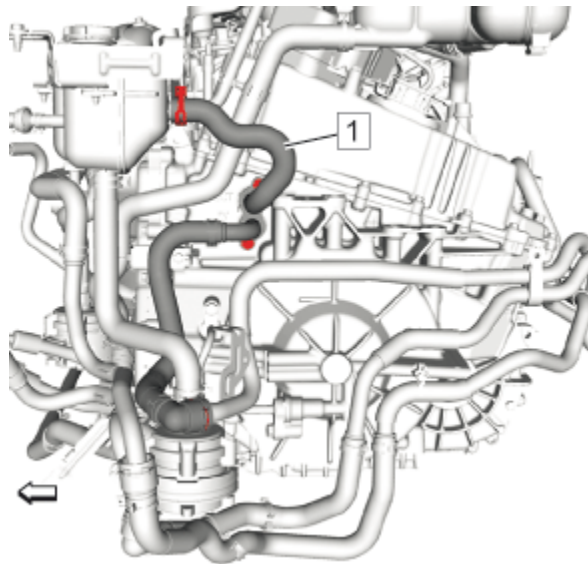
Drive Motor Generator Control Module Cooling Outlet Hose
